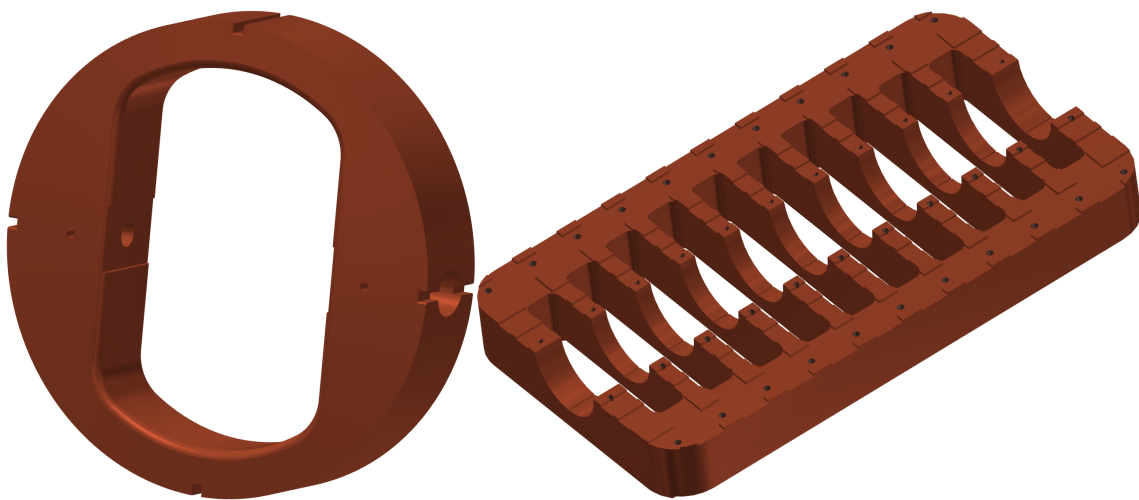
Isometric view of the ring (left) and the lower half-ladder (right). The outer diameter of the ring is 100 mm and the dimension of a half-ladder is 650x365x75 mm.
